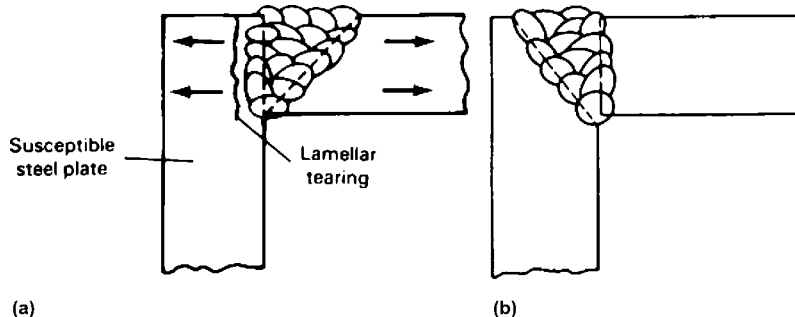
Corner joint. (a) Lamellar tearing surfaces at the exposed plate edge. (b) Redesigned joint
